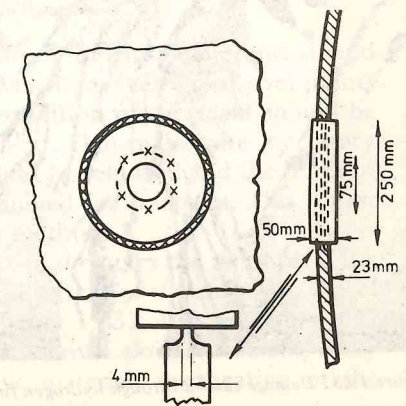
Welded insert repair for wastage of shell in way of feed check valve joint
